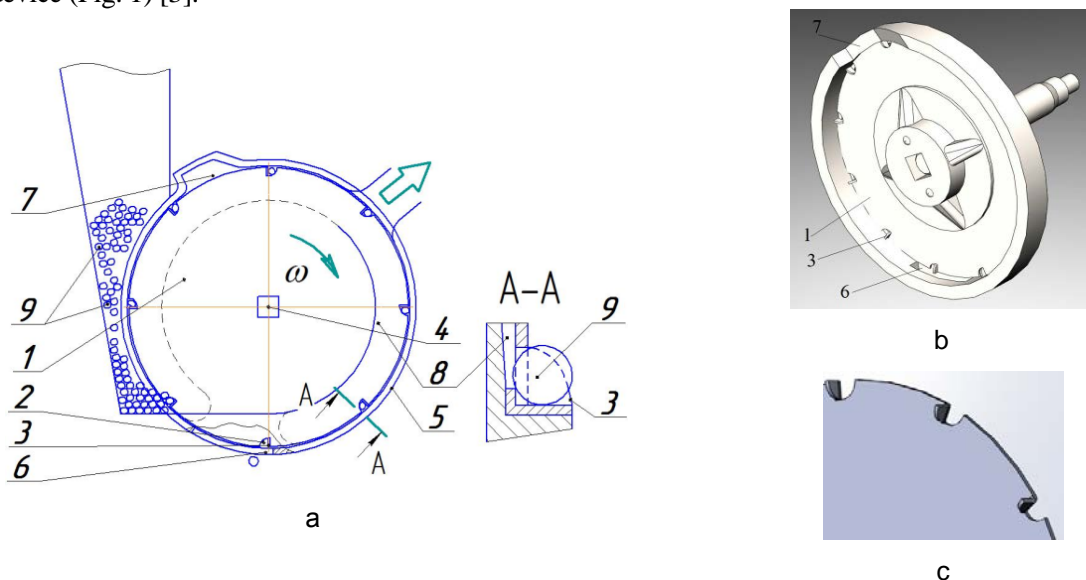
Pneumatic and mechanical sowing device: a – scheme; b – 3D model of the sowing device; c – 3D model of the fragment of sowing disk 1 – sowing disk; 2 – cell; 3 – blade; 4 – drive shaft; 5 – housing; 6 – seeding hole; 7 – passive device (container) for removing excess seeds; 8 – vacuum chamber; 9 – seeds
